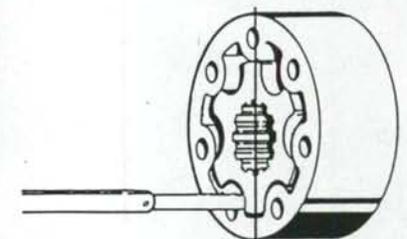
Measure gap between rotor and stator with rotor and stator aligned as shown. If gap exceeds 0.13 mm (0.005 inch), renew steering valve.
